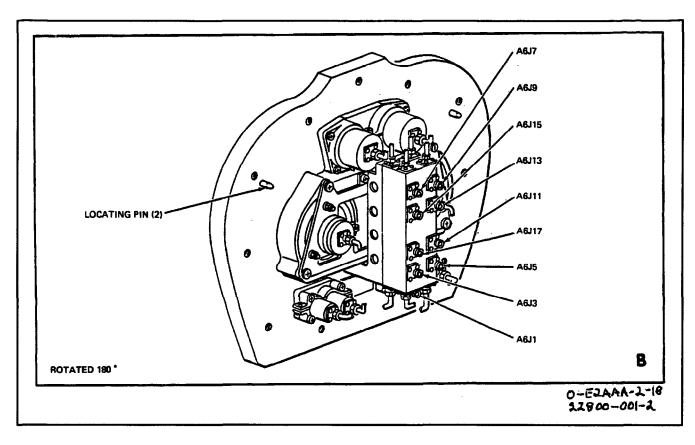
Removal and Installation of Antenna Assembly AS-2880/ALR-59 (Sheet 2)
